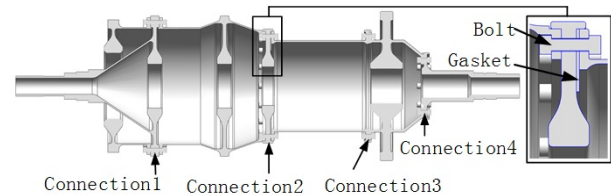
3D solid model of high-pressure rotor simulation tester with multiple bolted connection surfaces.
